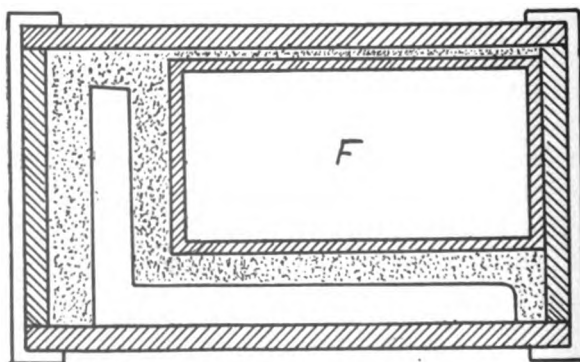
SECTION OF SEAT SLAB MOULD.
